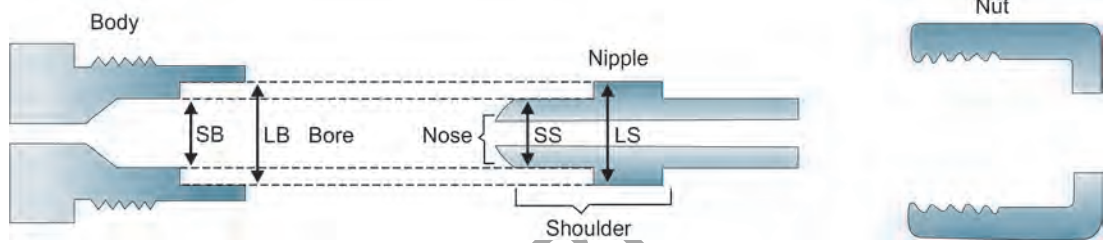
Diameter index safety system. (SB: Small bore; LB: Large bore; SS: Small shoulder; LS: Large shoulder).
